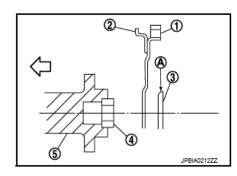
Identifying Ring Gear, Pilot Converter, Crankshaft And Drive Plate And Reinforcement Plate
